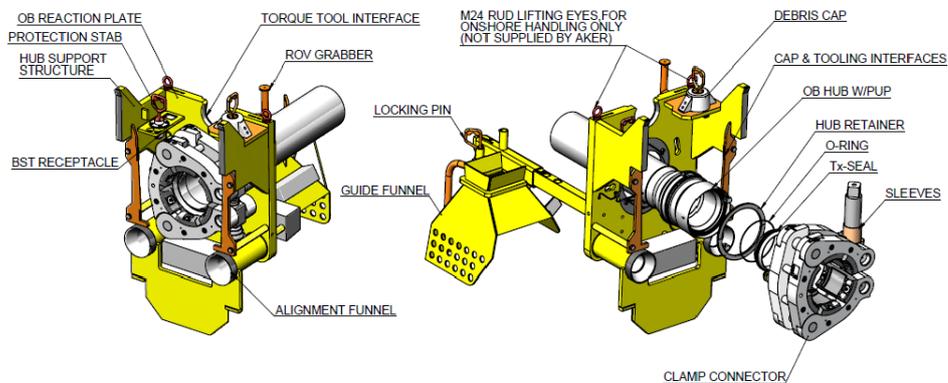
AKSO Horizontal Connection System (HCS) Inboard End, Rigid type
